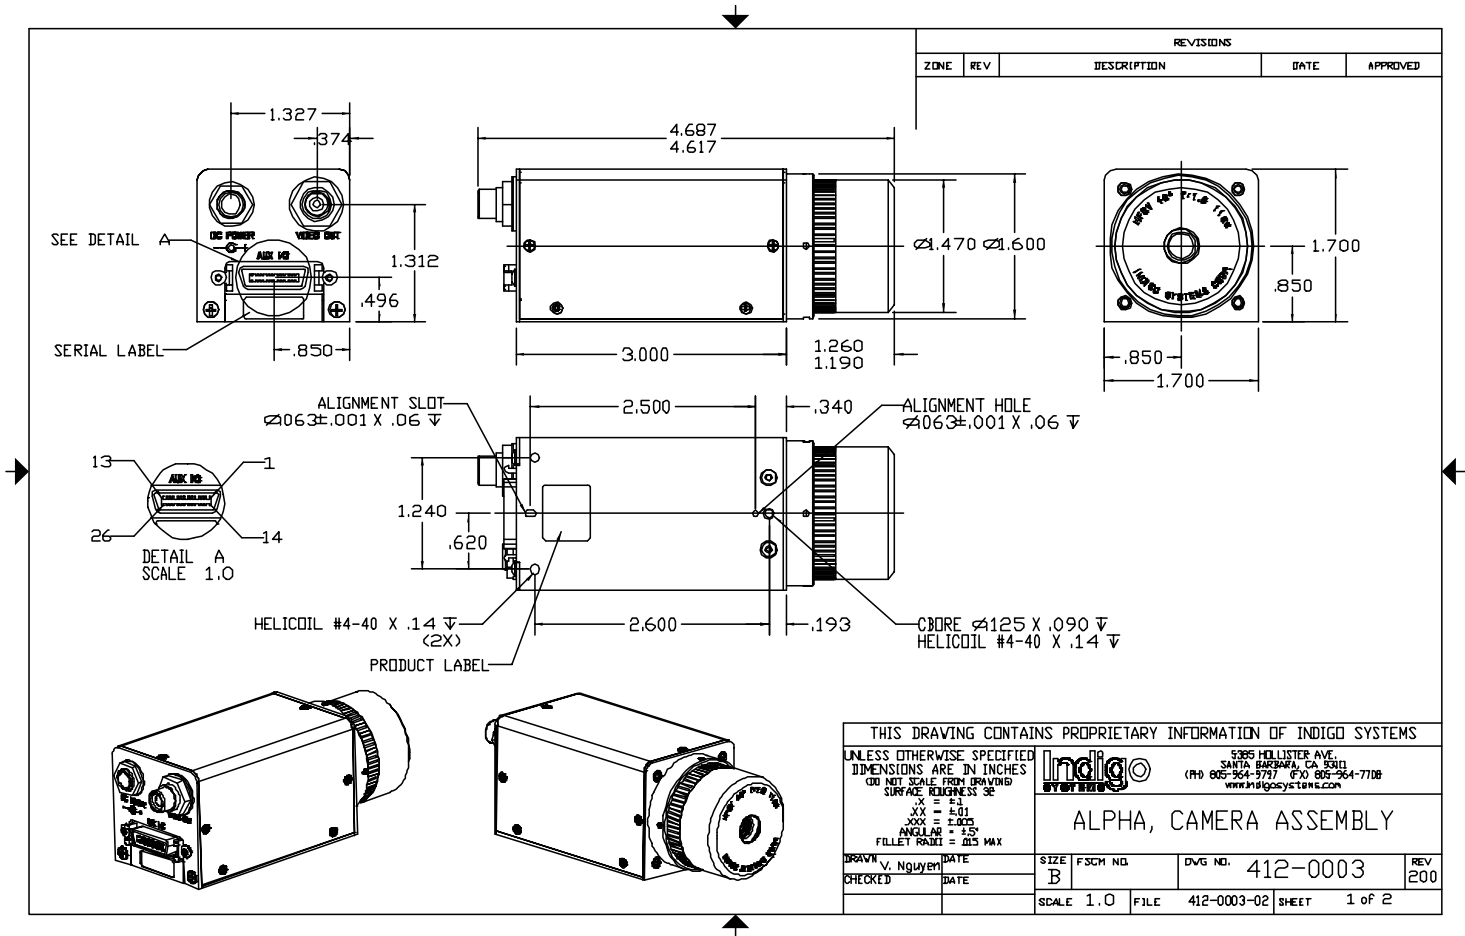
Opto-Mechanical Interface Drawing (40° FOV Lens)
